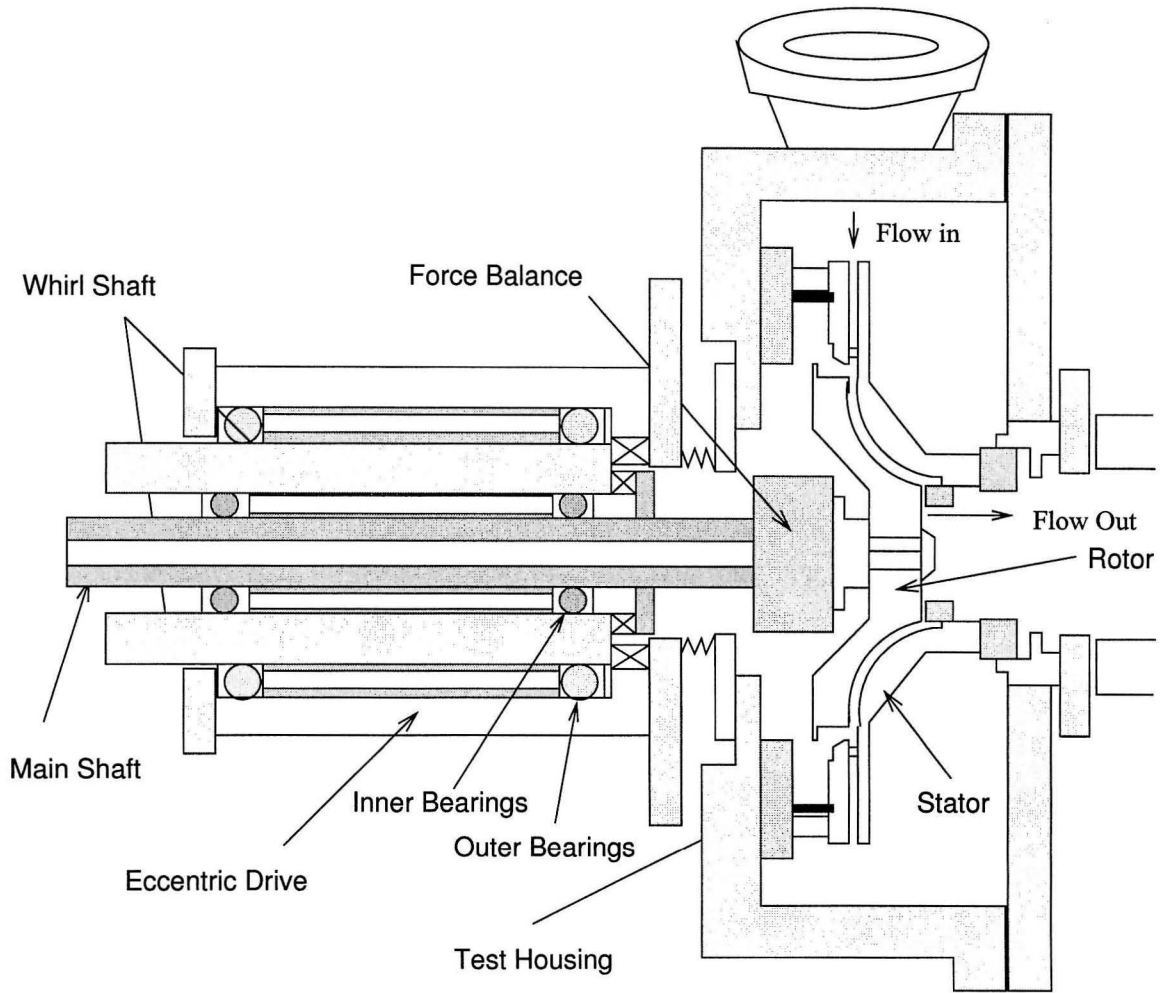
Main test section showing the eccentric drive with contoured impeller
